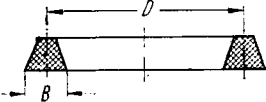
Right-angle seal with gold ring gasket.
